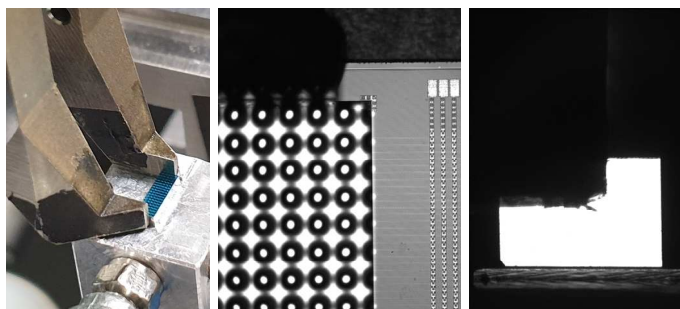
Lens array preliminary passive alignment. a) Micro lens array pick up with alignment bench. b) Top and c) profile view of the lens array and chip during passive alignment
